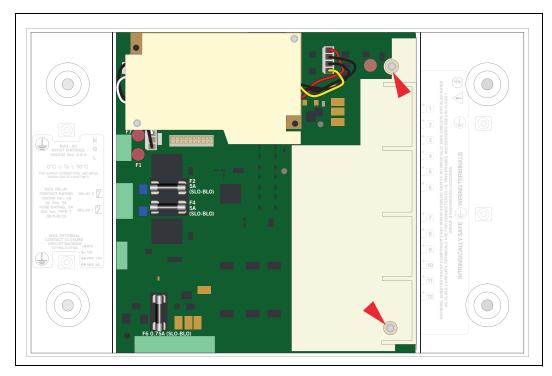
Remove Two T15 Screws Securing I.S. Cover
